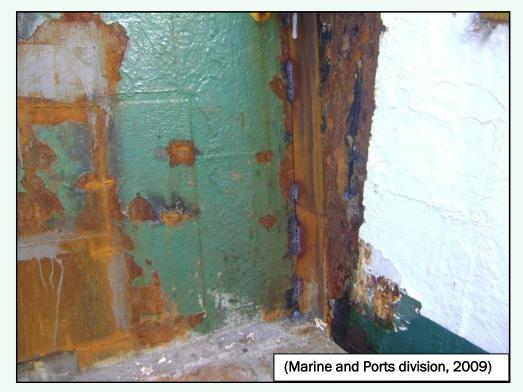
Welded bow ramp with cement covering the hinge
